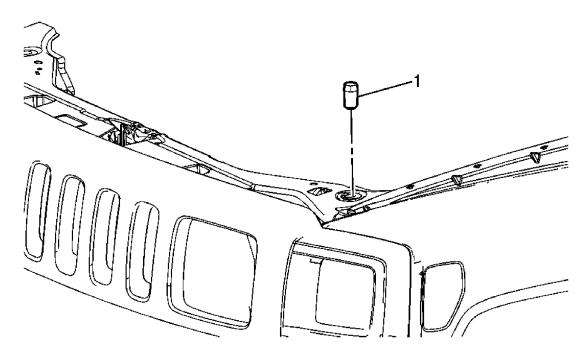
Hood Bumper Replacement Courtesy of GENERAL MOTORS CORP.
